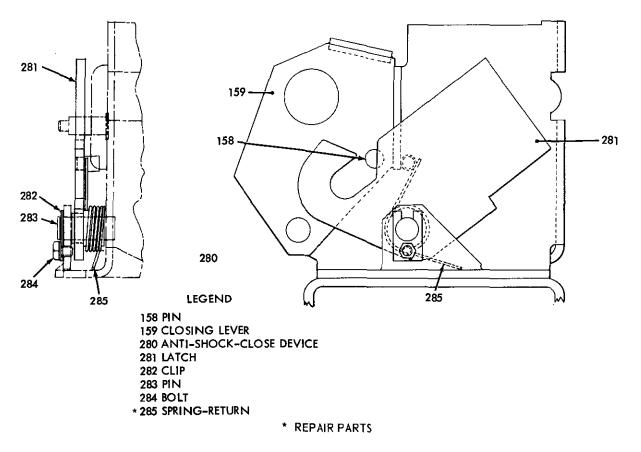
Anti-Shock-Close Device and Retriever Assembly
